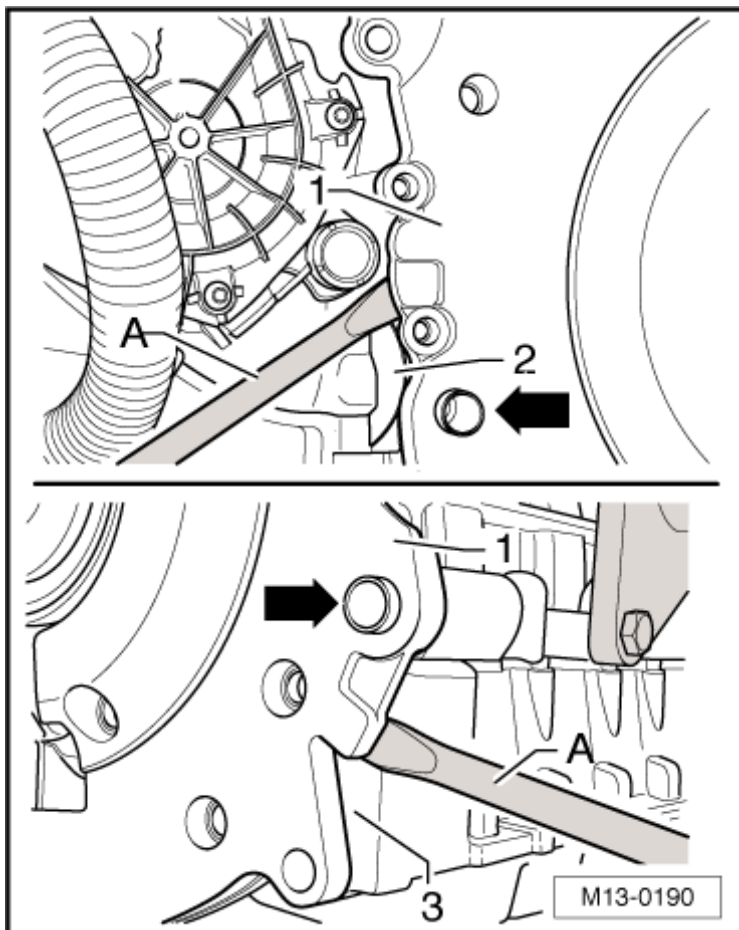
Pressing Off Control Housing Cover From Cylinder Block Or From Upper Section Of Oil Pan At Positions Designated At Top And Bottom Using Suitable Screwdriver
